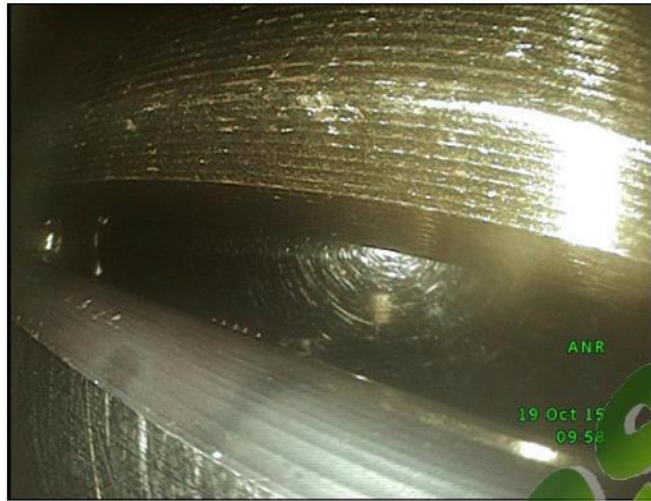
shows bearing position no. 10, the bearing of the high speed shaft at rotor side. The bearing shows no irregularities.
